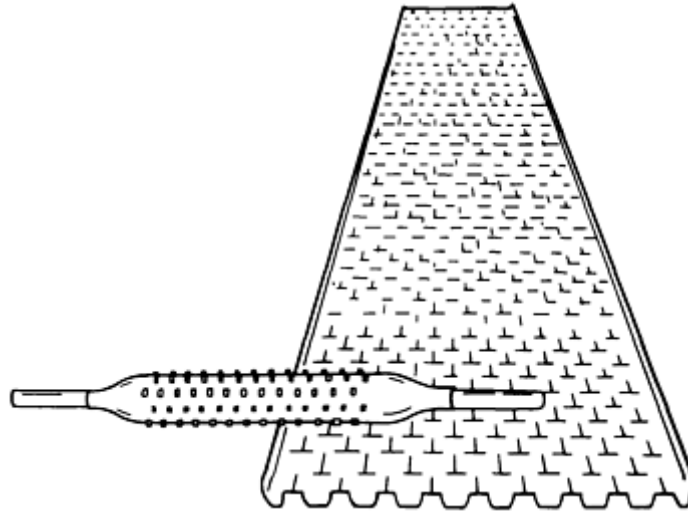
Conveyor belt assembled with 100 mm (4 in.) pitch and drive drum ready for installation
